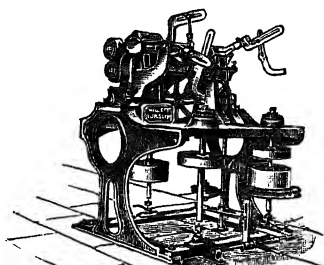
Automatic Machine for making Wash Bowls, etc.
